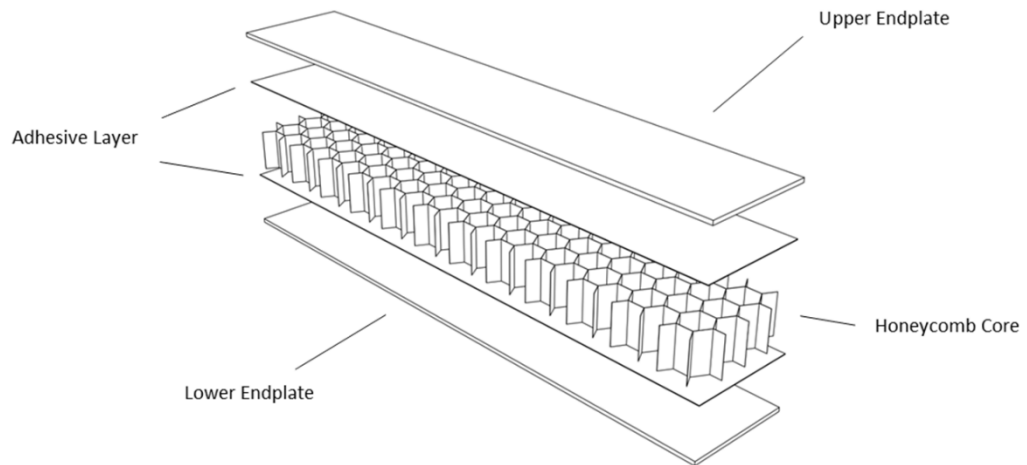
Honeycomb Sandwich Panel (HSP) exploded view [193]
